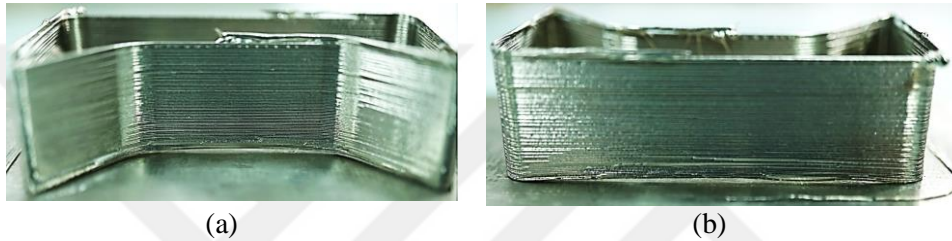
Separation of the printed part's first layer from the middle section of the copper-clad board due to the improper leveling during printing of a open shell box with 78 layers at ET of 180 °C ; a) front view and b) back view
